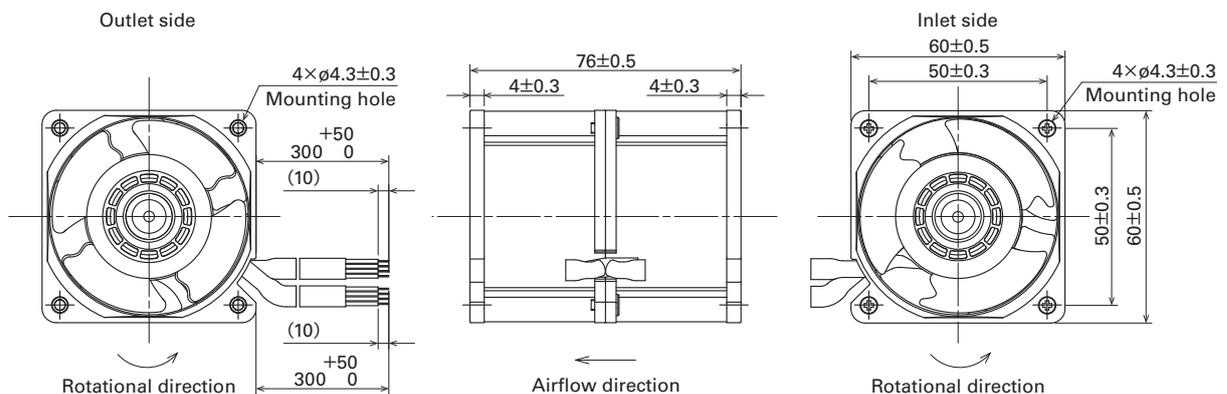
Dimensions of 60 × 60 × 76 mm *San Ace 60L 9CRLB* type (Unit: mm)
